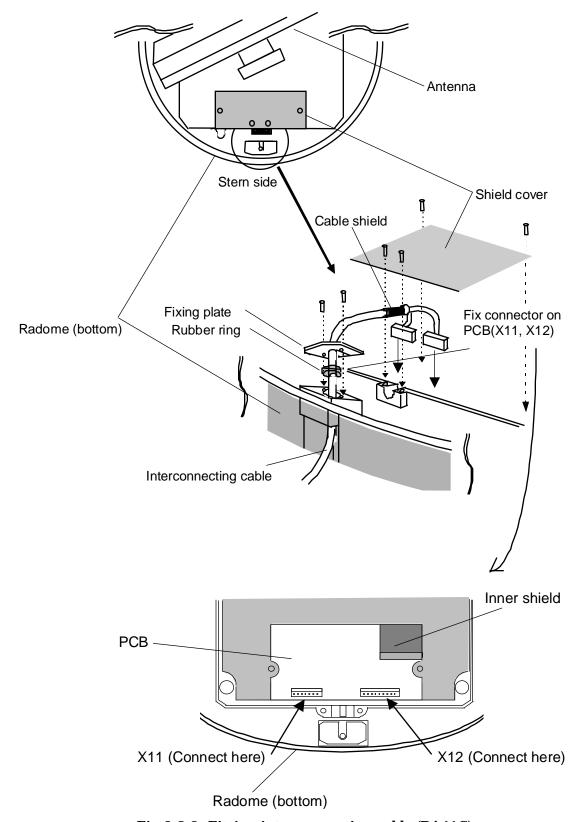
Fitting interconnecting cable (RA41C)
